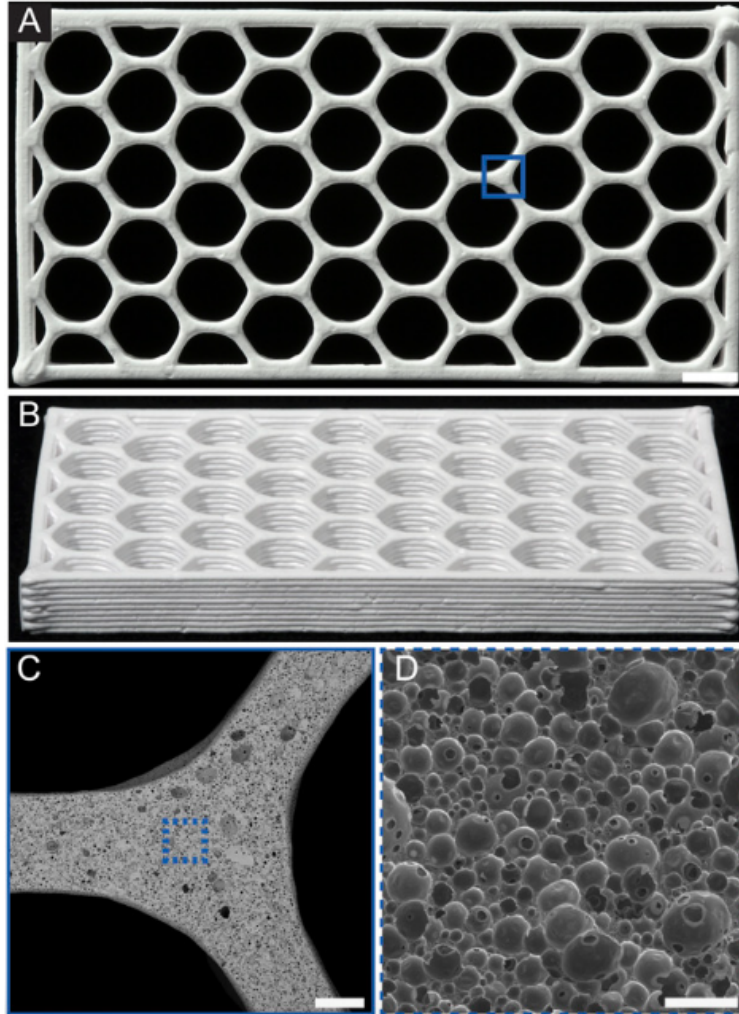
3D printed porous ceramic hexagonal unit-cell structures printed using foamed alumina slurry. Taken from [250].
